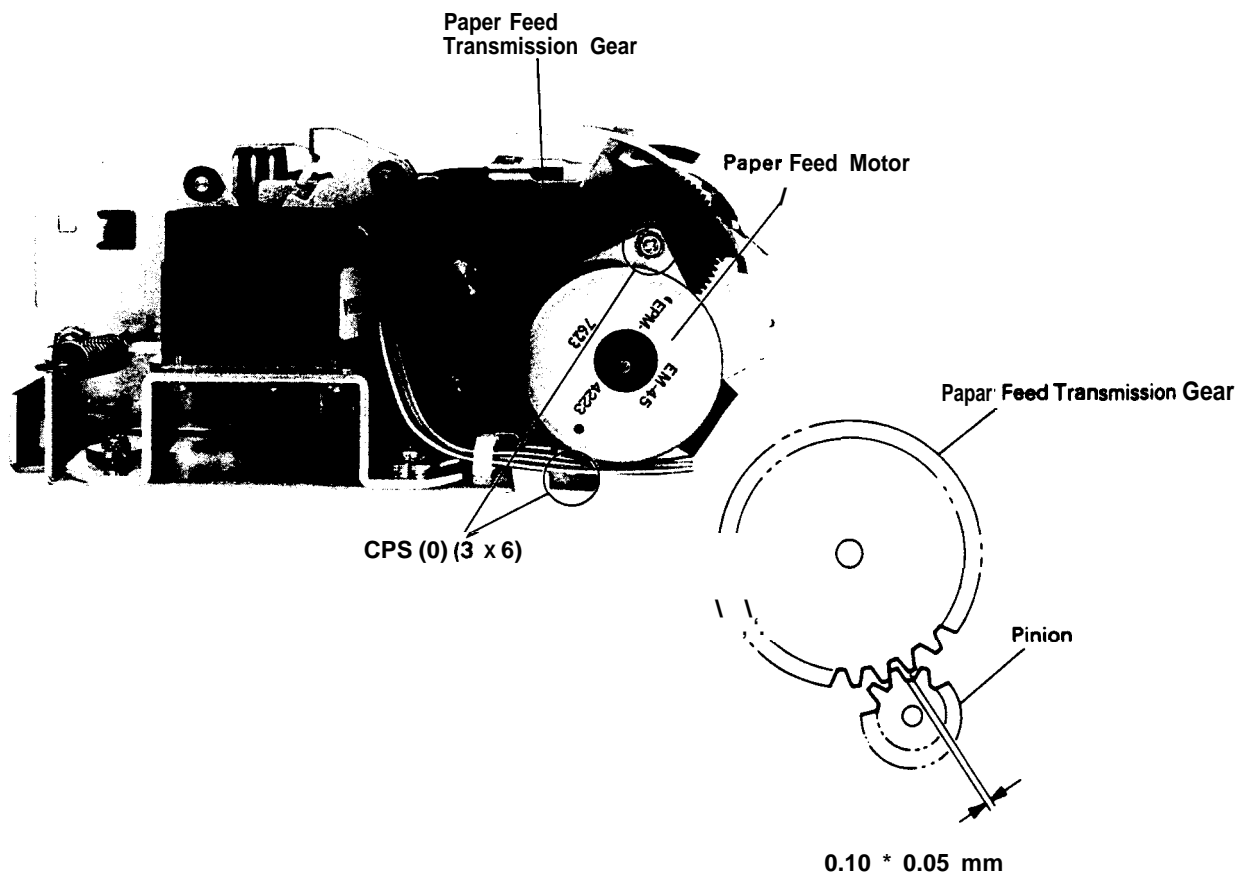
Paper Feed Motor Pinion Gear Backlash Adjustment
